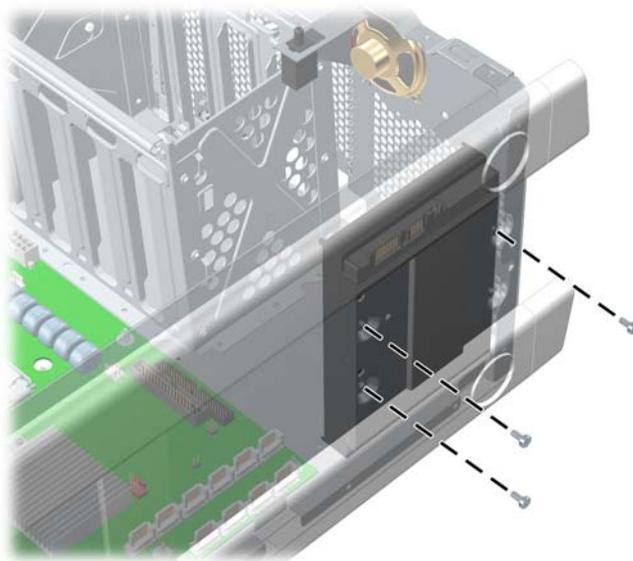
Installing screws for the hard drive in the fifth hard drive bay
